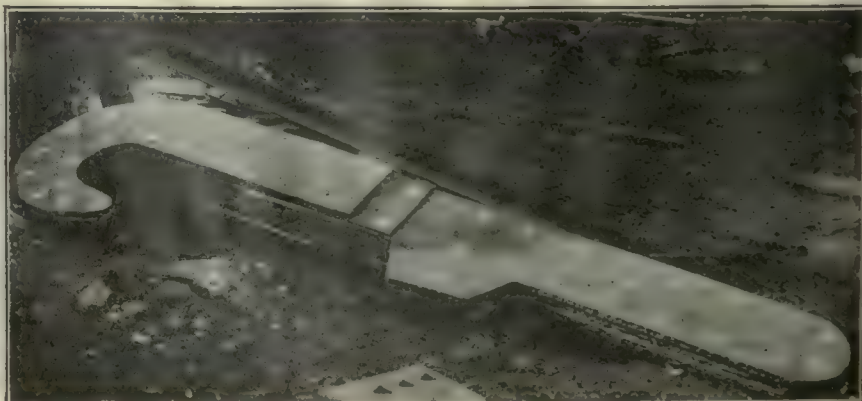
LADLE HOOK MADE OF TORCH-CUT PLATES
